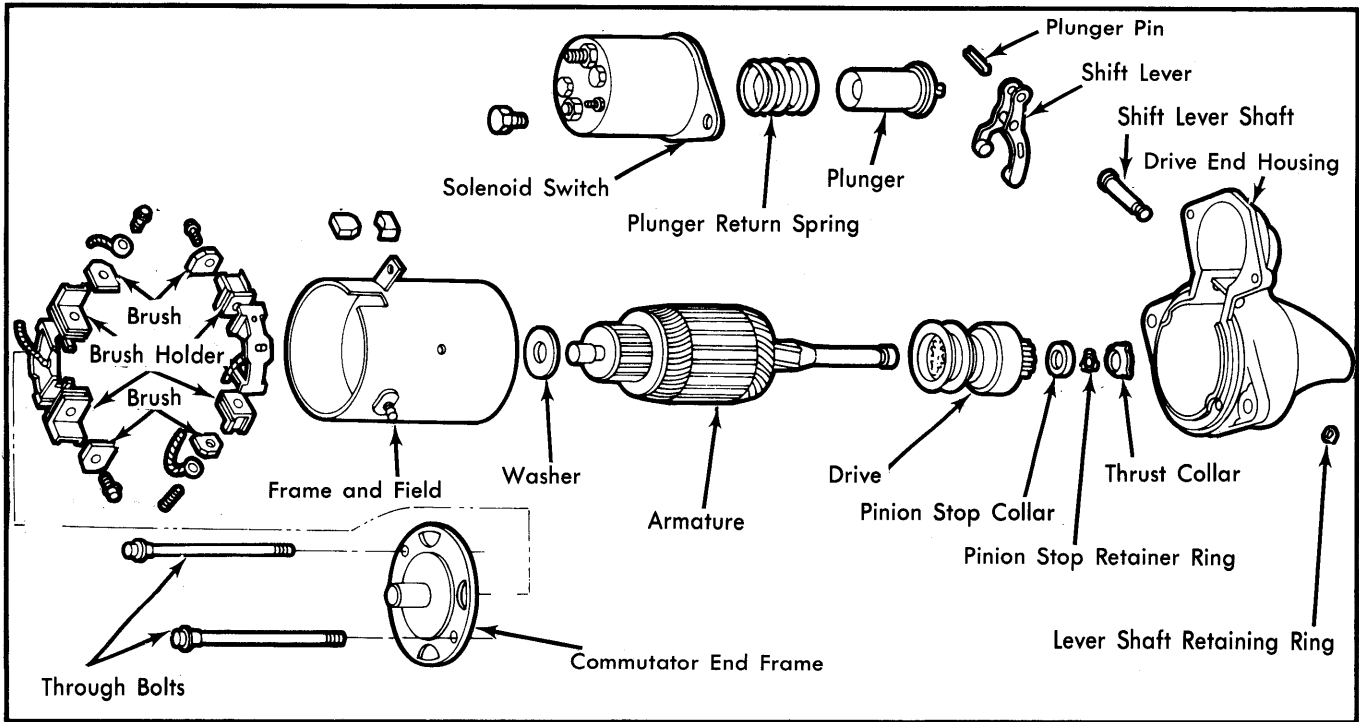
Exploded View of Delco-Remy V8 Diesel Starter Motor (25MT & 27MT)
